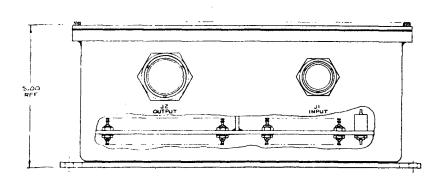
TYPICAL OVERALL PACKAGE ASSEMBLY
